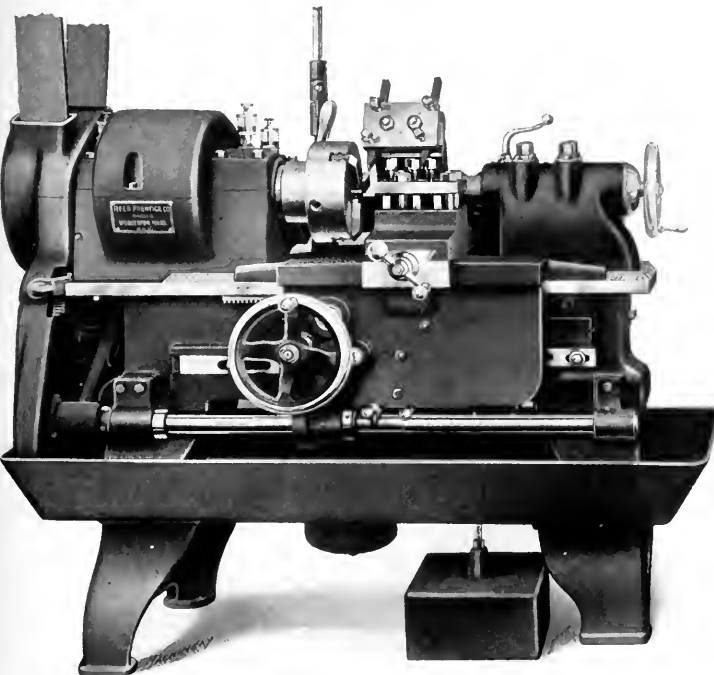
Reed-Prentice Automatic Lathe for turning and facing Forgings and Castings
